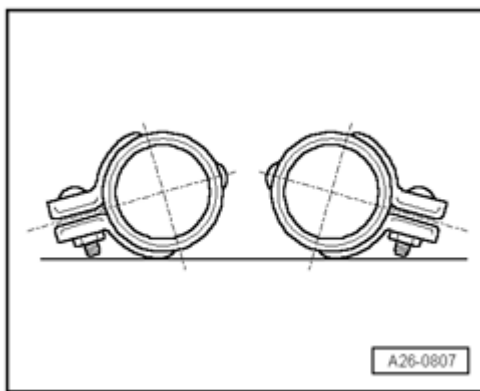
Adjusting Front Double Clamps So Bolt Ends Do Not Project Over Lower Edges Of Double Clamps
